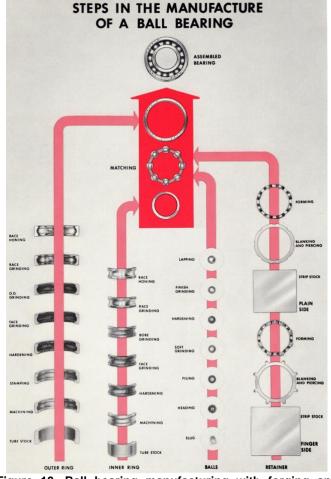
Ball bearing manufacturing with forging and annealing steps skipped [10]
